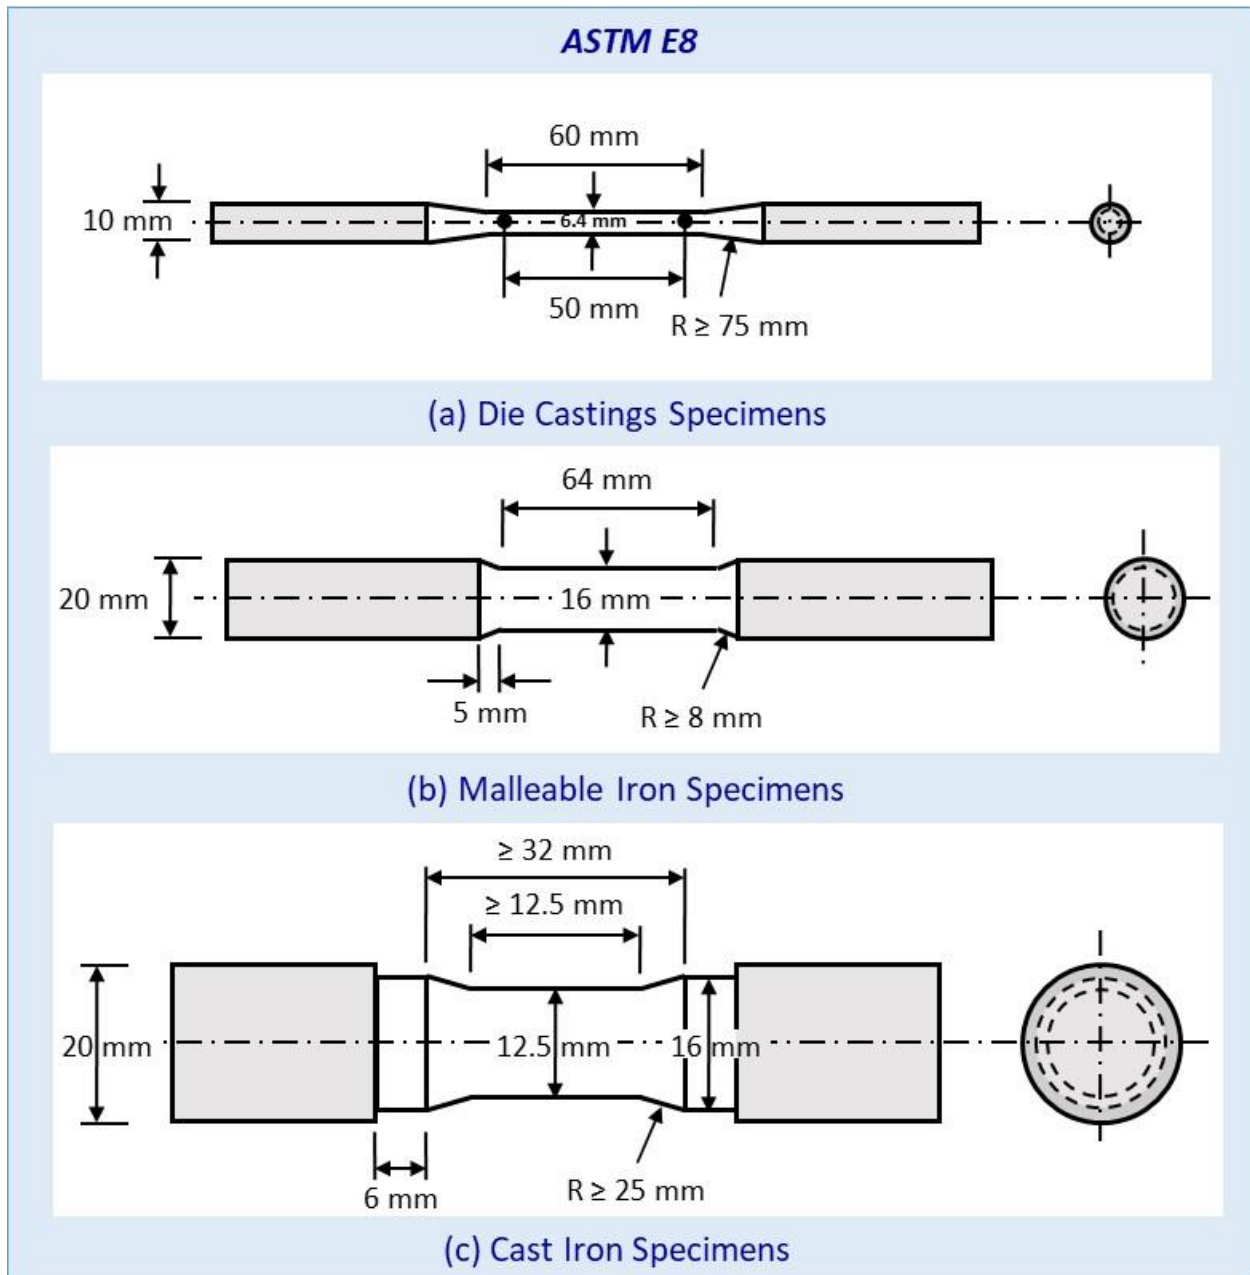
Standard specimen configurations for E8 tension testing of castings [ref. 26]: (a), specimens from die castings; (b), specimens from malleable iron; (c), specimens from cast iron.
